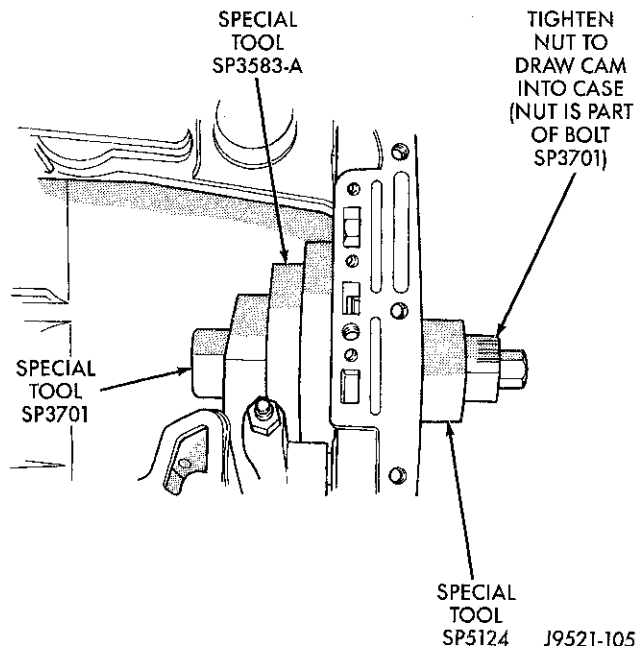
Pressing Overrunning Clutch Cam Into Case
